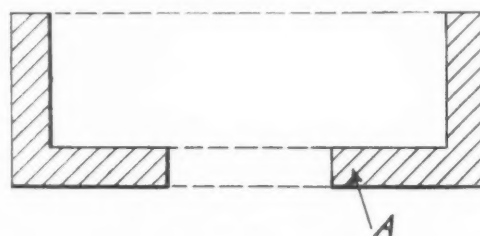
Filler Cup to be Used With Boiler Punch Die
